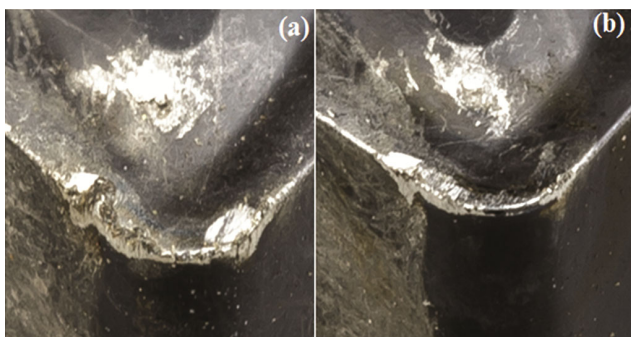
Tool Wear Pattern on Tool Nose (a) Dry Turning, and (b) Wet Turning.
